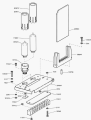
3D CAD MODELING OF THE BOARD ASSEMBLY
